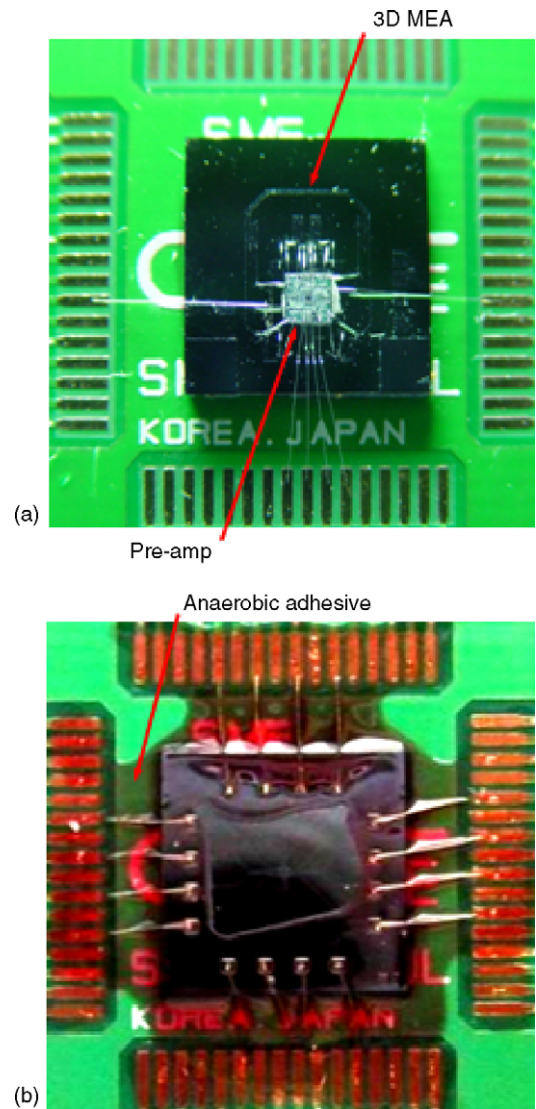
Photos of (a) the wire bonding of a 2 × 2 MEA chip with a pre-amp chip and the PCB, and (b) the protection of wires after covering with epoxy encapsulation.
